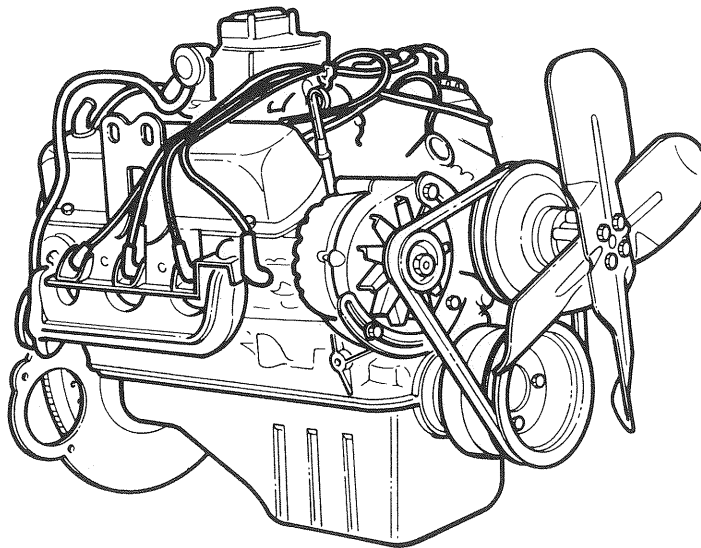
CSG-850 Engine — Typical (Left 3/4 Front View)
